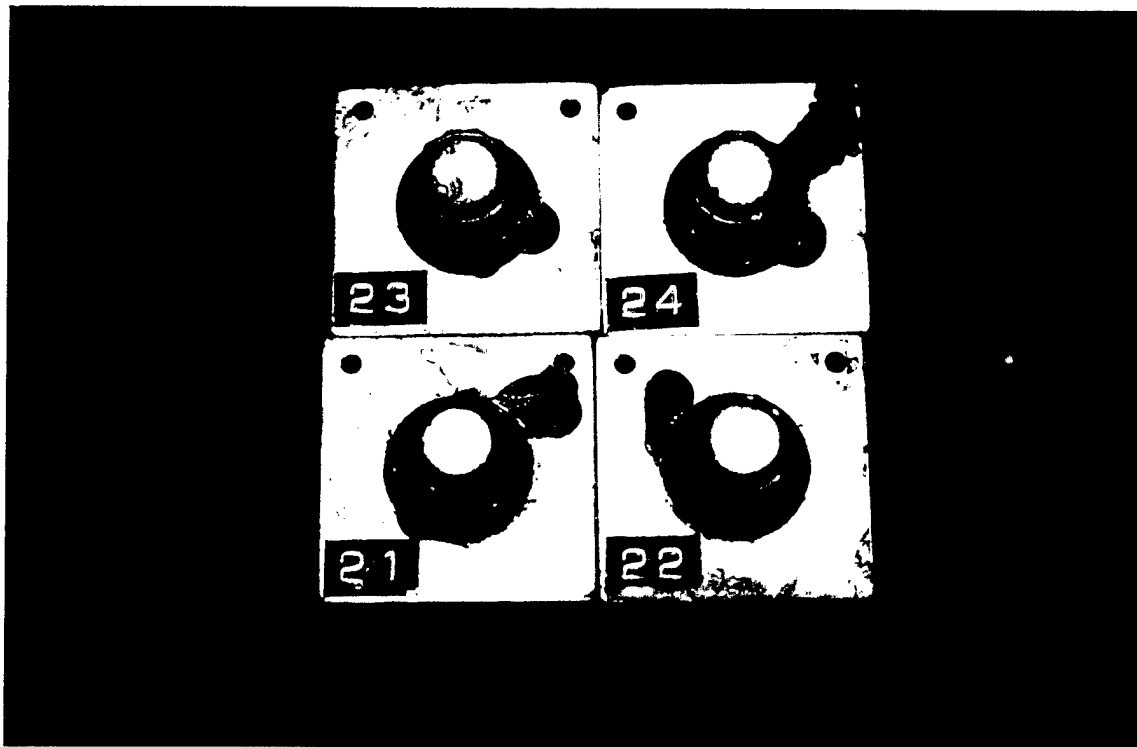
H11 Chromium Hot Work Tool Steel Nuts With Cadmium Electroplate After 44 Days of Salt Spray. Reduced 25%.
